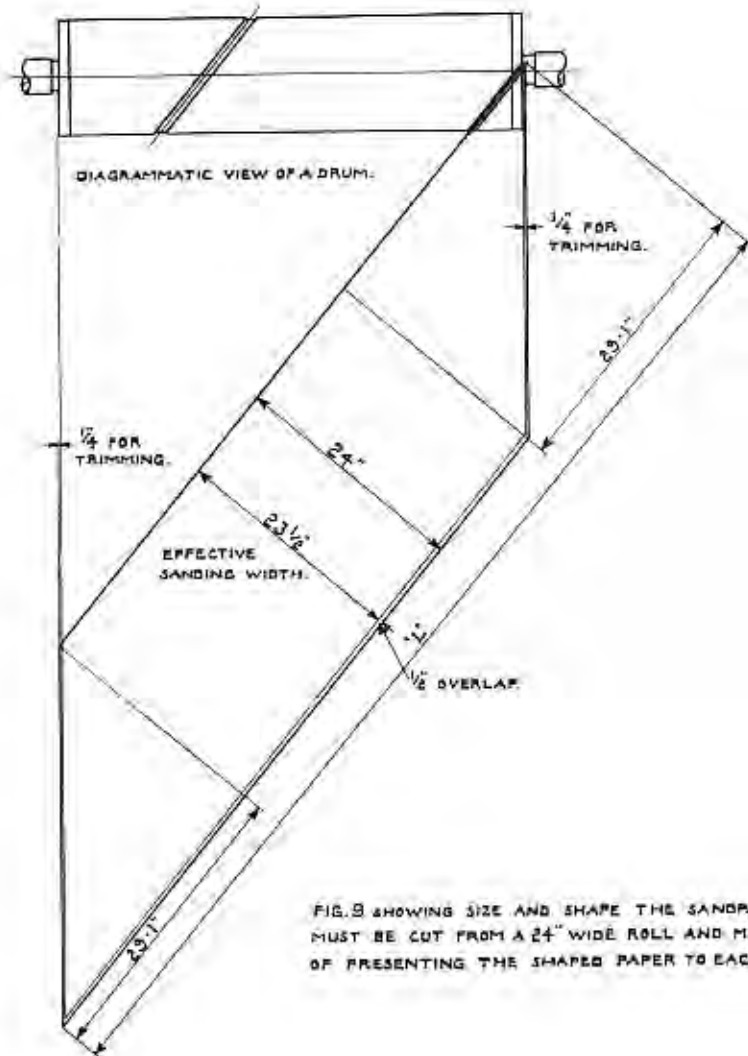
SHOWING SIZE AND SHAPE THE SANDPAPER MUST BE CUT FROM A 24" WIDE ROLL AND METHOD OF PRESENTING THE SHAPED PAPER TO EACH DRUM.
